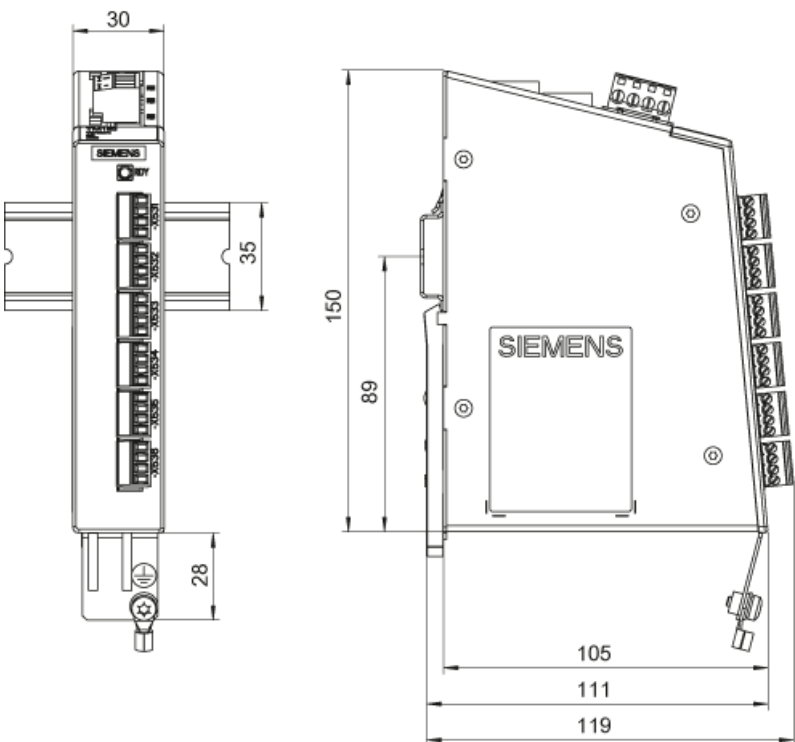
Dimension drawing Terminal Module 150 (TM150)
